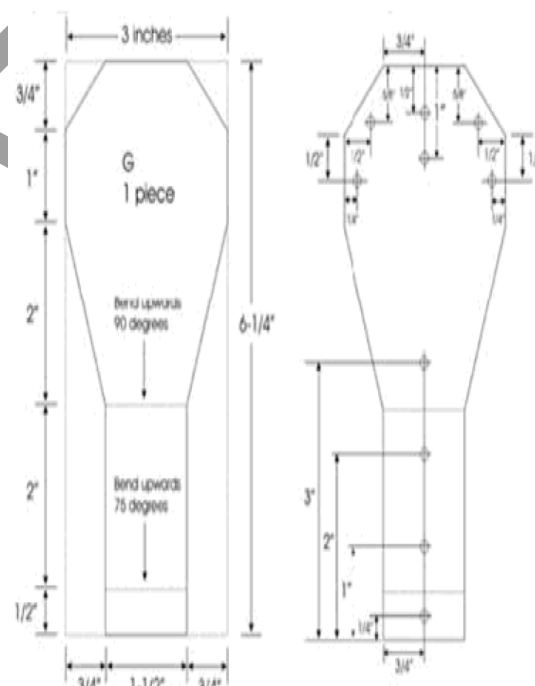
cutting ,drilling and bending guide for bottom head piece.
